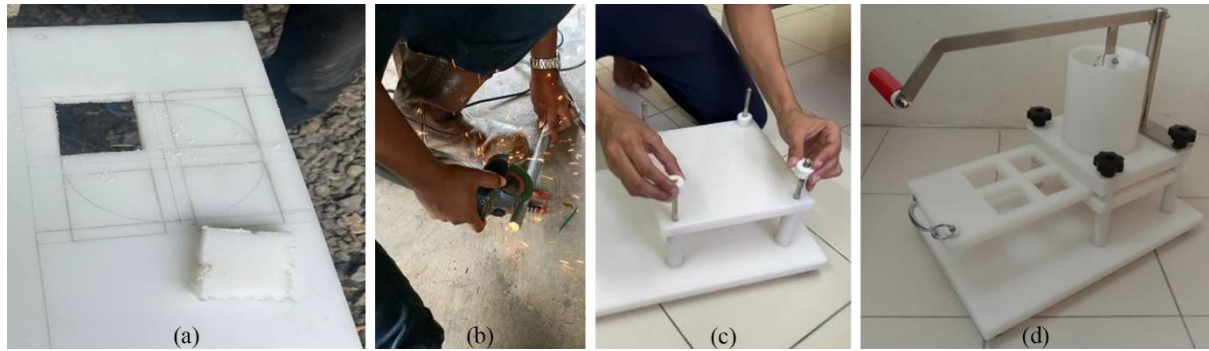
Main fabrication steps and the completed prototype. (a) Layout and cutting of the PE boards. (b) Cutting and shaping of the bushings. (c) Assembly of the base and bottom plate. (d) Fully assembled prototype, including the lever arm, reservoir and mould plate.
